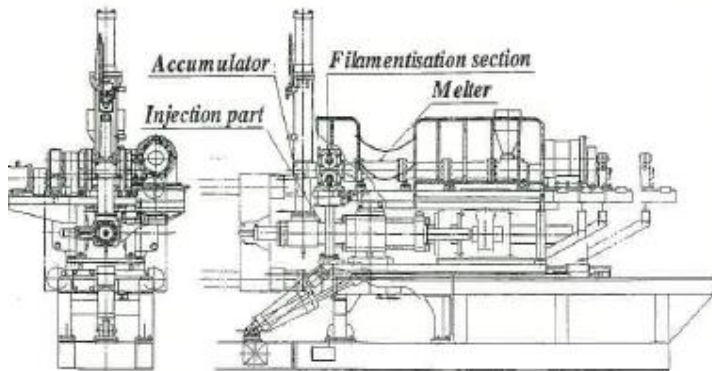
New moulding machine (CCM) for LFRTP pellet except clamp unit.
